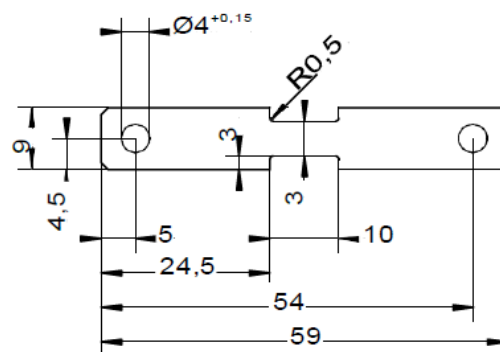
Technical drawing of the testing specimen used in the dilatometer (mm)
